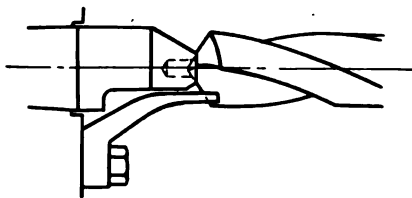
Driver for Twist Drills leaving full length clearance for Grinding Wheel
